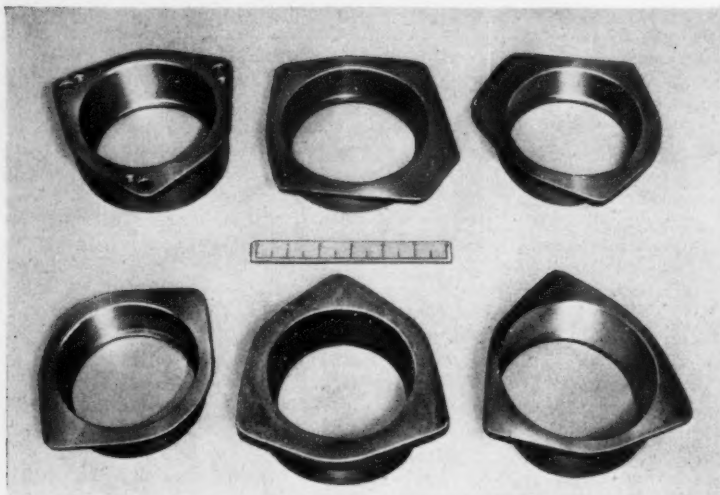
Typical Gear-box Bearing Housings which are Machined on the Monforts Chucking Automatics at the Works of Bristol Commercial Vehicles. A Malleable Iron Casting, before Machining, is seen in the Centre of the Bottom Row
